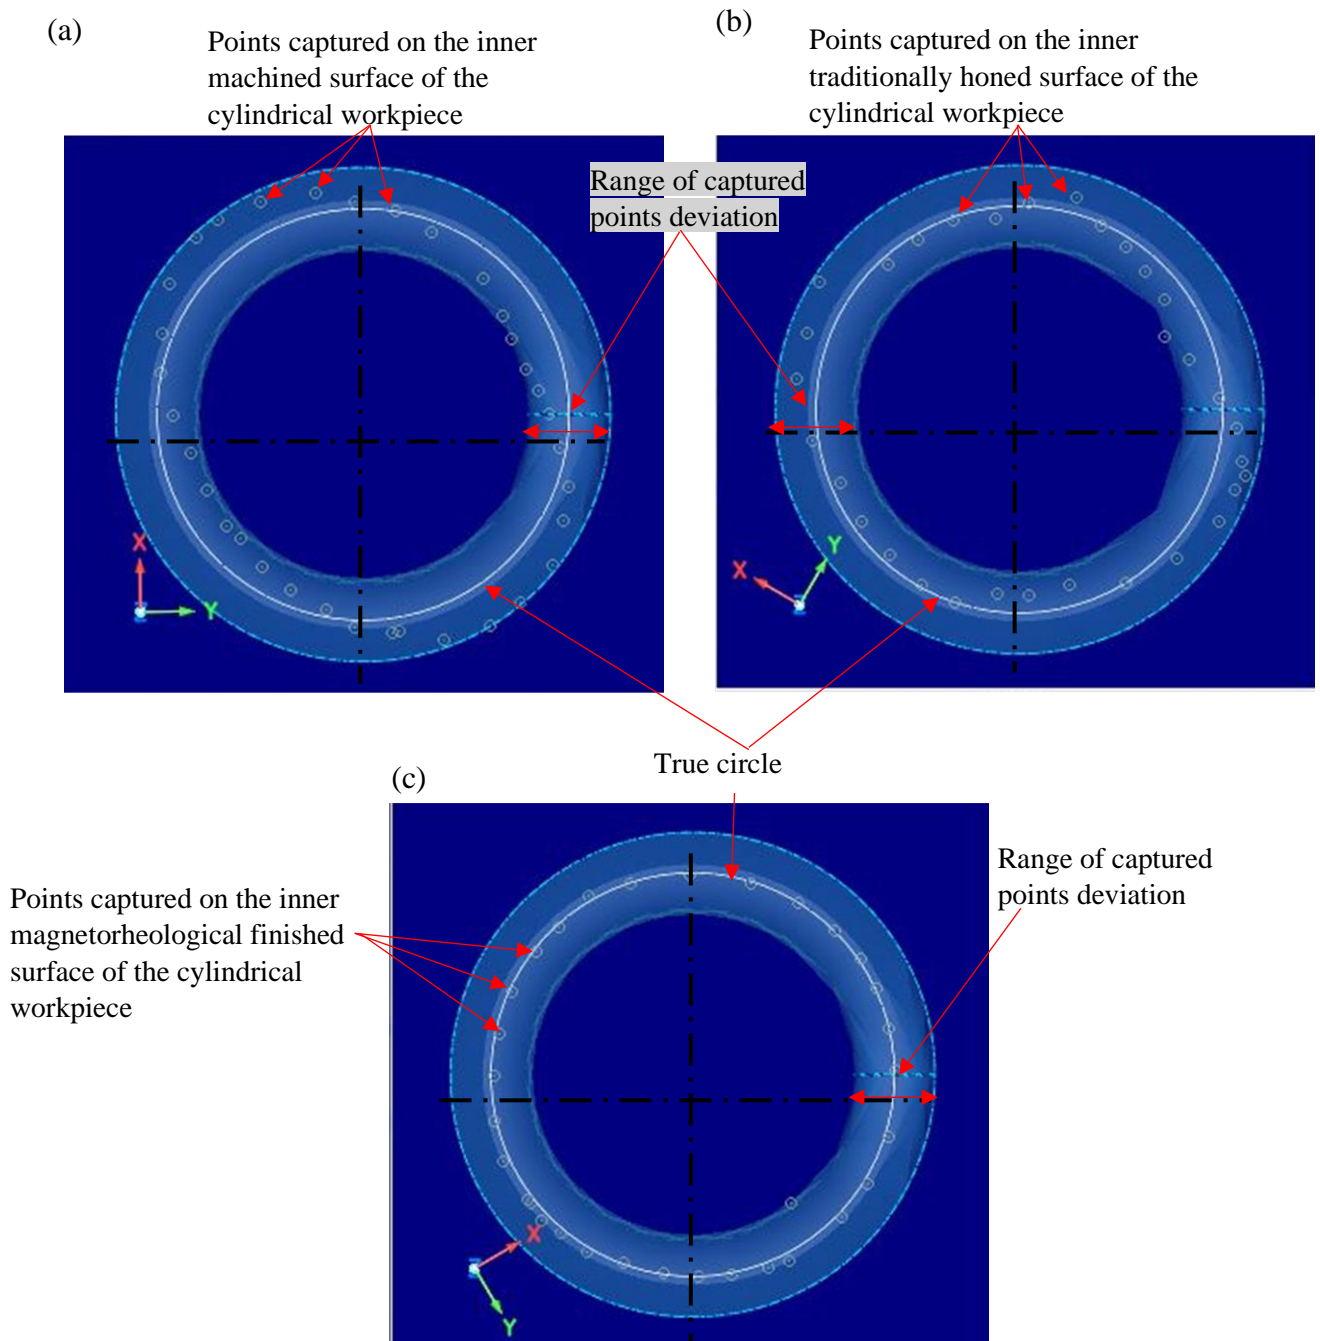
Circularity photograph of (a) initial machined interior surface of the cylindrical workpiece, (b) interior surface of the cylindrical workpiece with 40 min of traditional honing and (c) final finished interior surface of the cylindrical workpiece with 60 min of magnetorheological finishing using the same in-situ honing tool.
